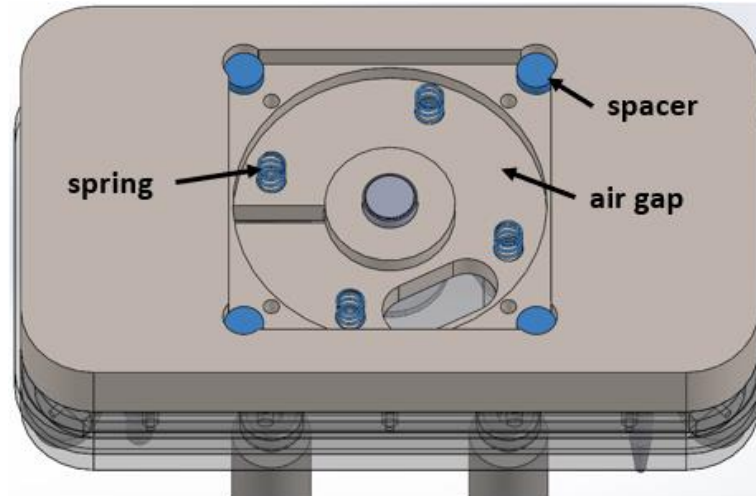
Modified build plate with spacers and springs to support the ring heater.
